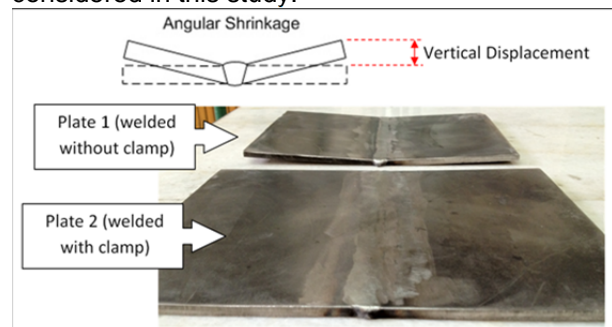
Angular shrinkage produced after the welding of Monel plates
